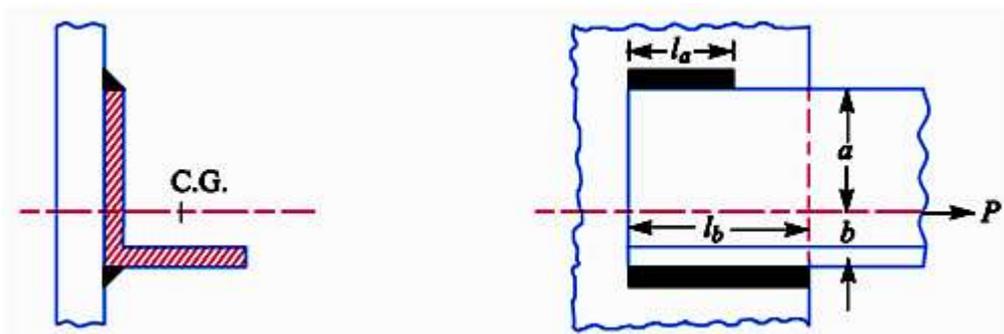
Axially Loaded Unsymmetrical Welded Sections
